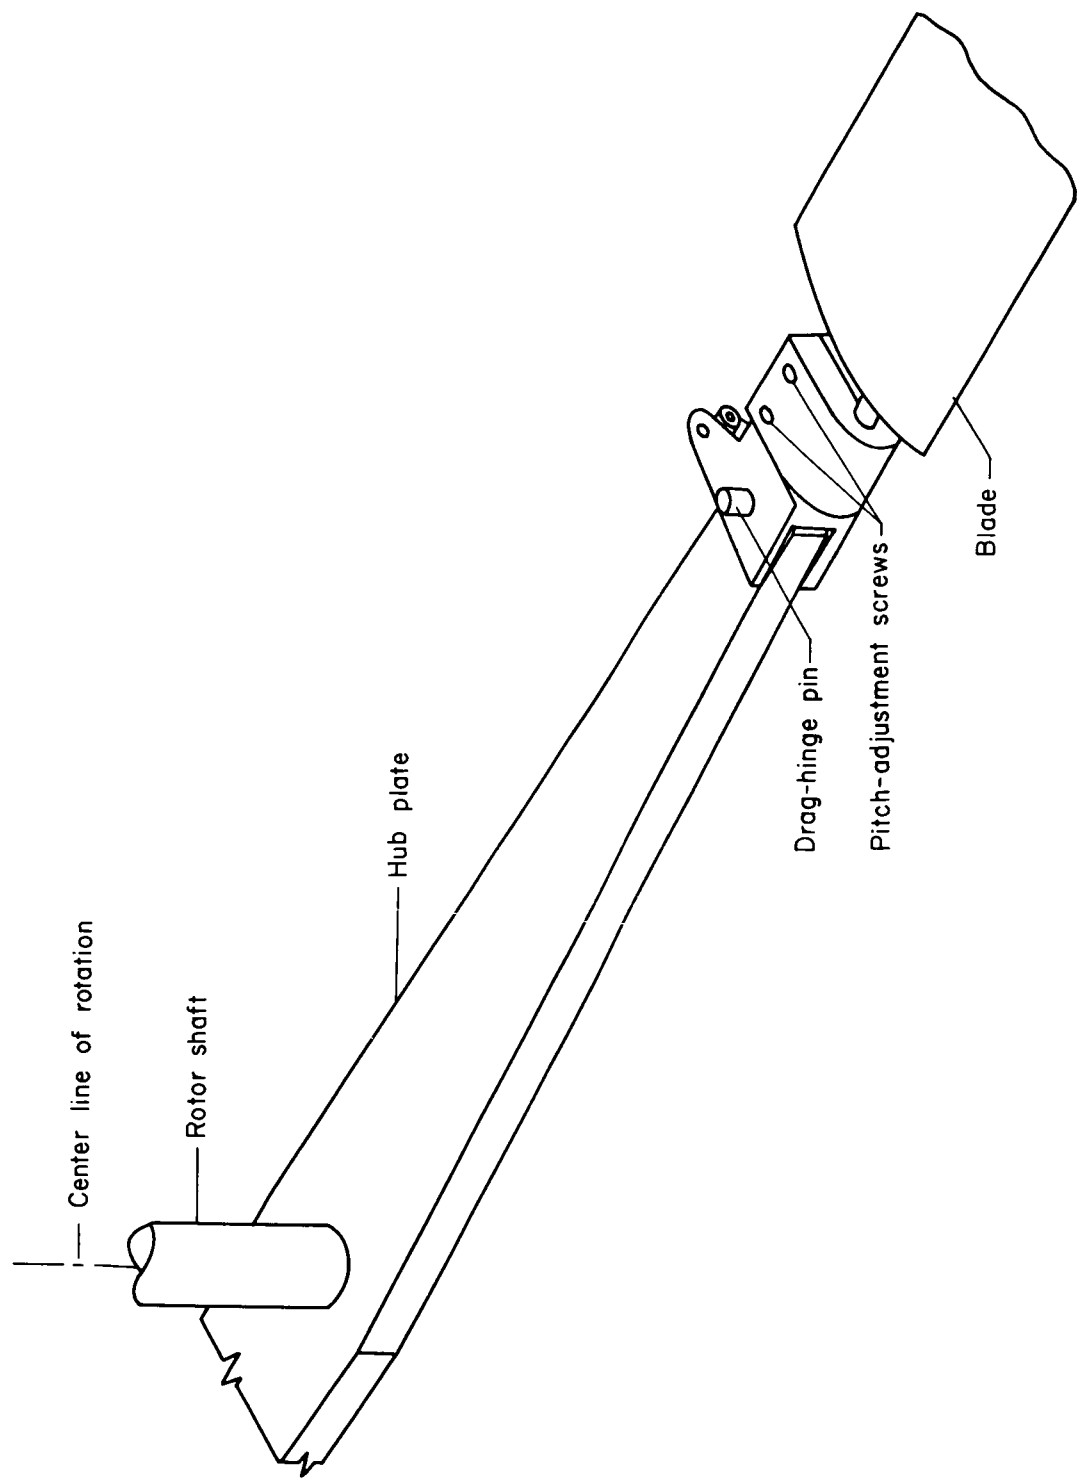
Sketch of blade root fitting for fixed-at-root configuration.
